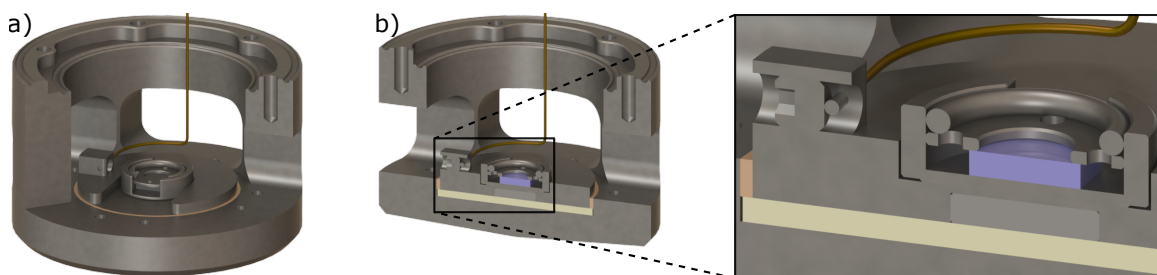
(a) Sample holder exchange system of version 3 outer STM with magnetically attached sample holder, and (b) sectional view with close up of the sample holder and the integrated connector box.
